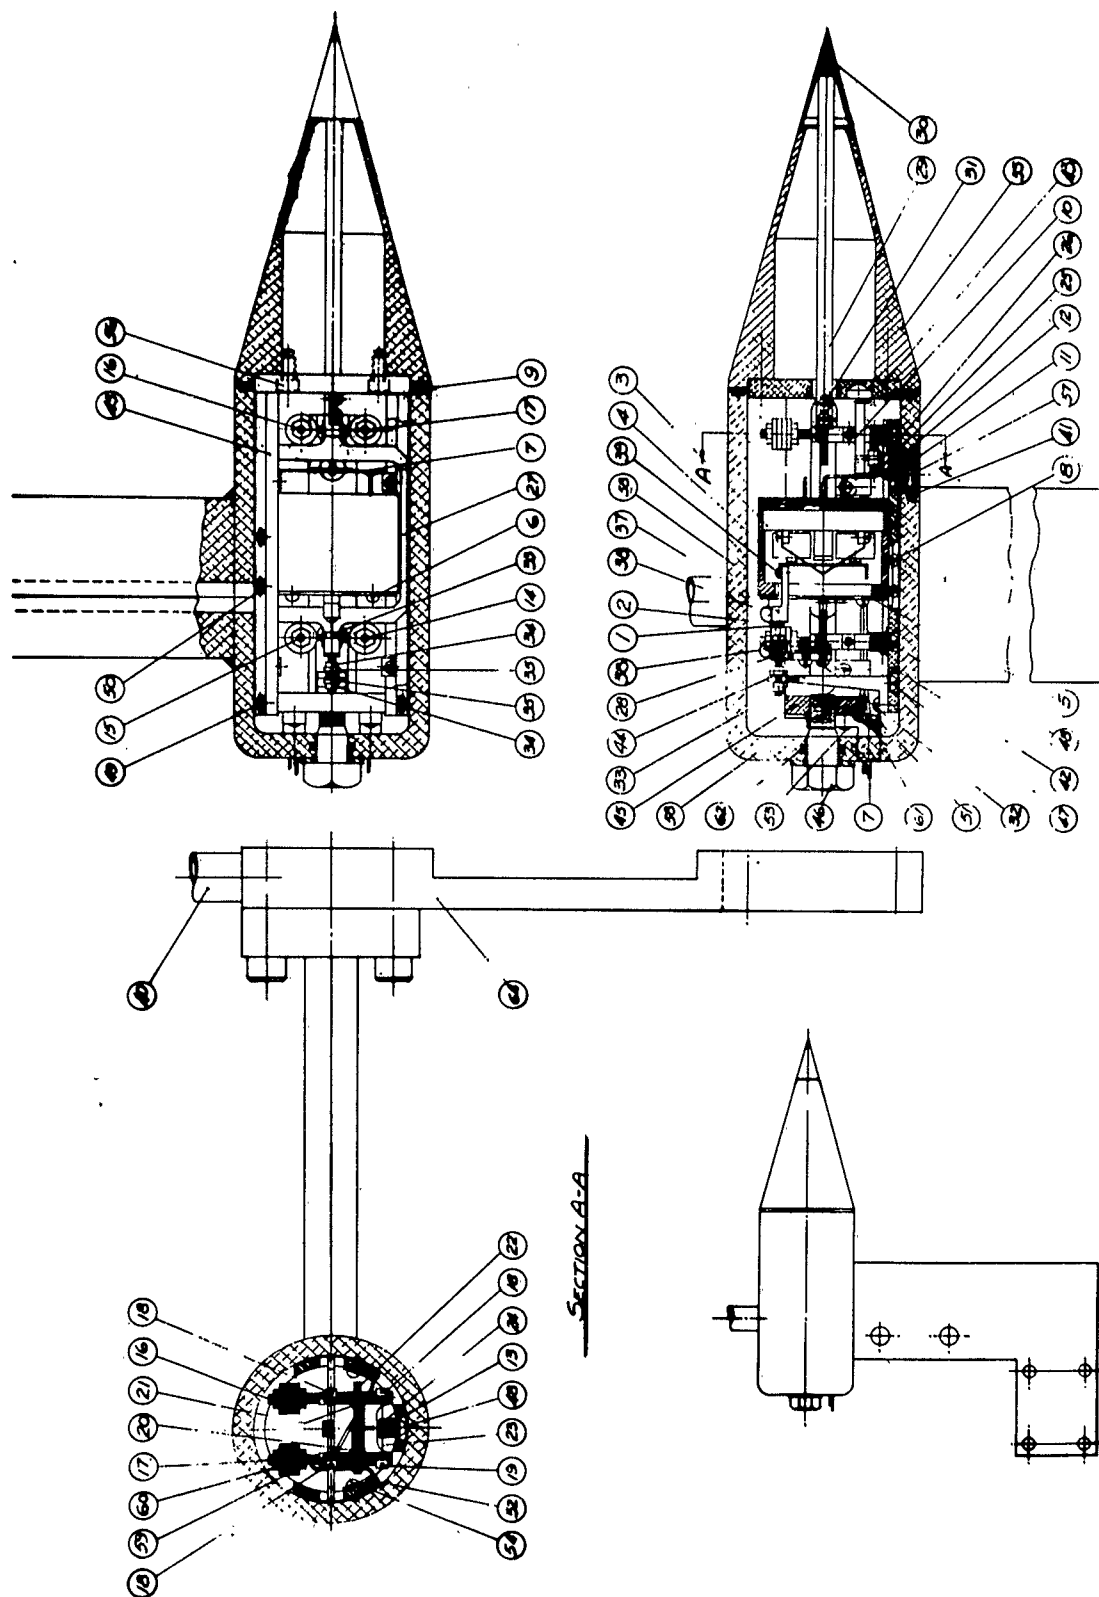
ASSEMBLY DRAWING OF BALANCE
